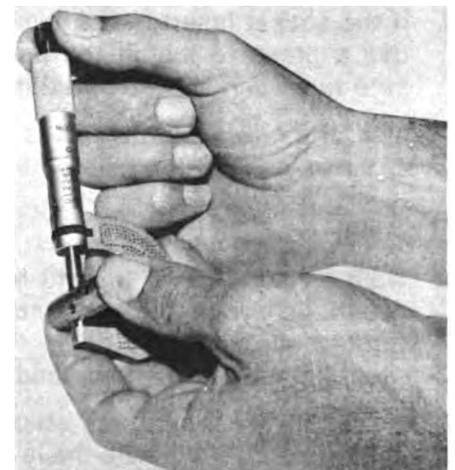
(N10416). Measure The O.D. Of The Roller Pin.
